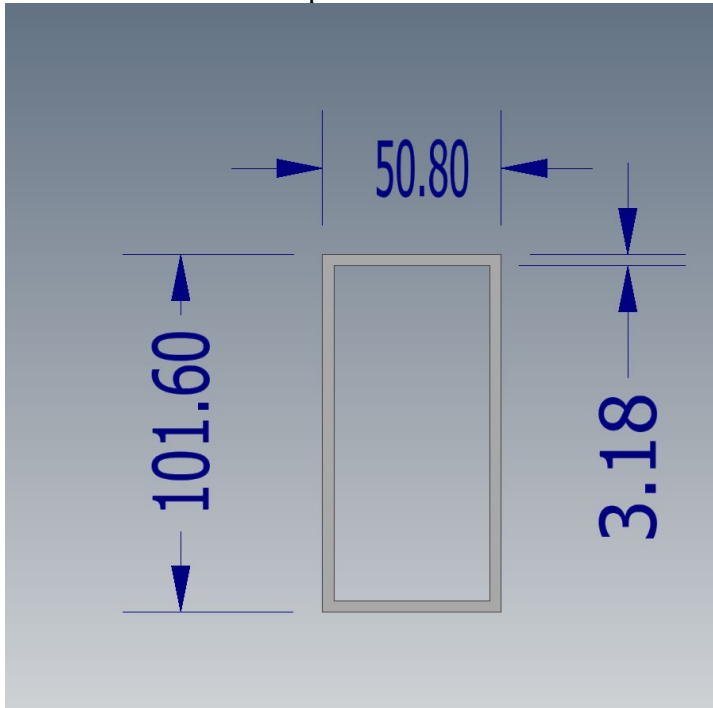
Cross sectional geometry of spreader bars, all dimensions are in units of millimeters.
